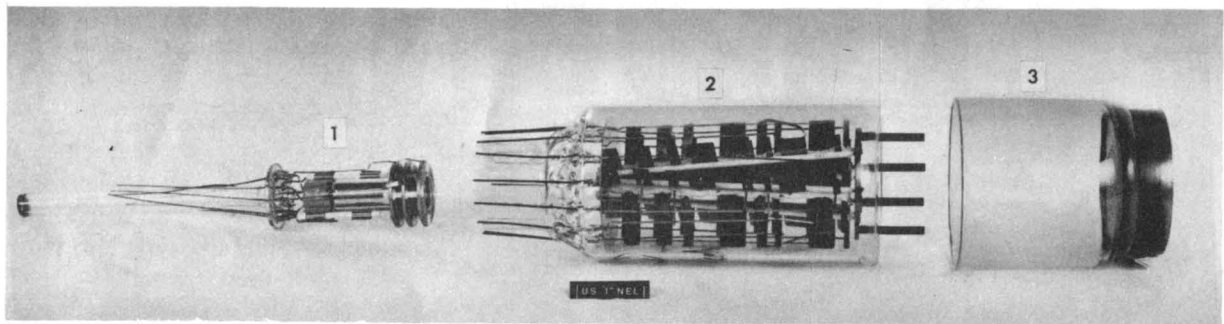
The three sections of the Electrical Matrixatron before final assembly.
